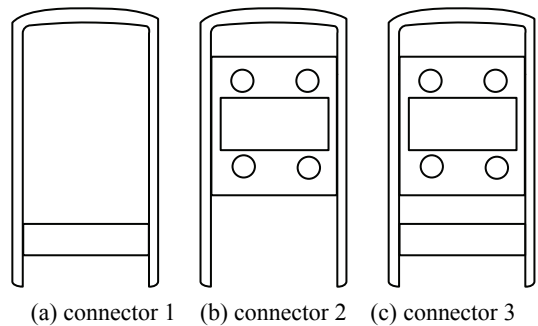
Connector shape of mobile metal front case to reduce twisting after forming
